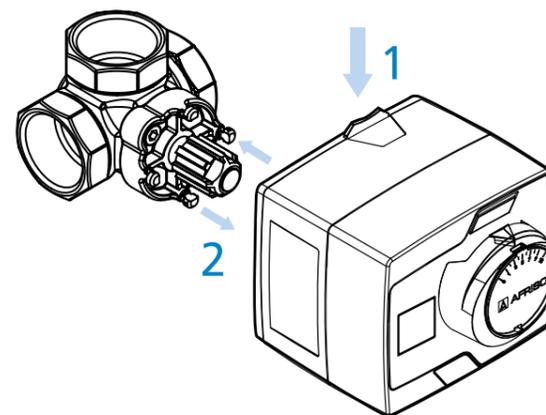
Mounting/dismounting of an ACT ProClick controller on a valve
